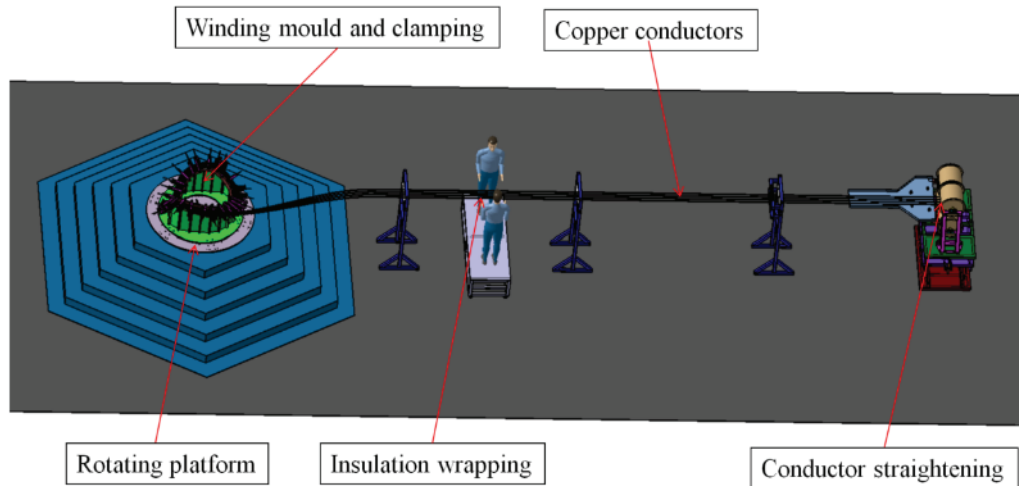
Conceptual design of the coil winding manufacture line.
